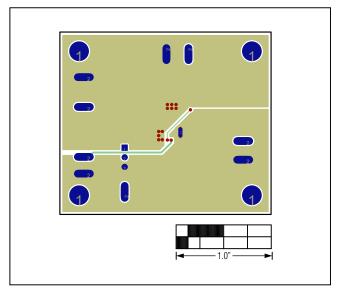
MAX17542G 3.3V Output EV Kit PCB Layout—Solder Side
